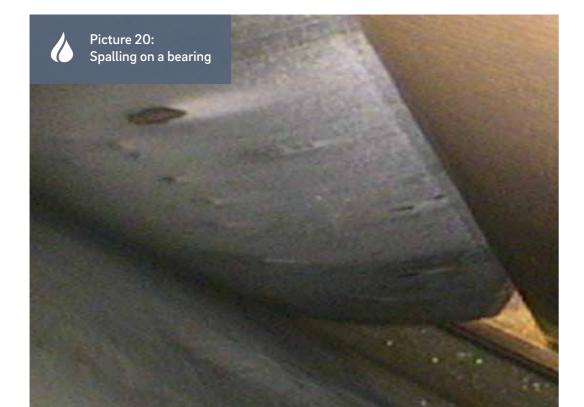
and 20 show spalling damage on a bearing.
